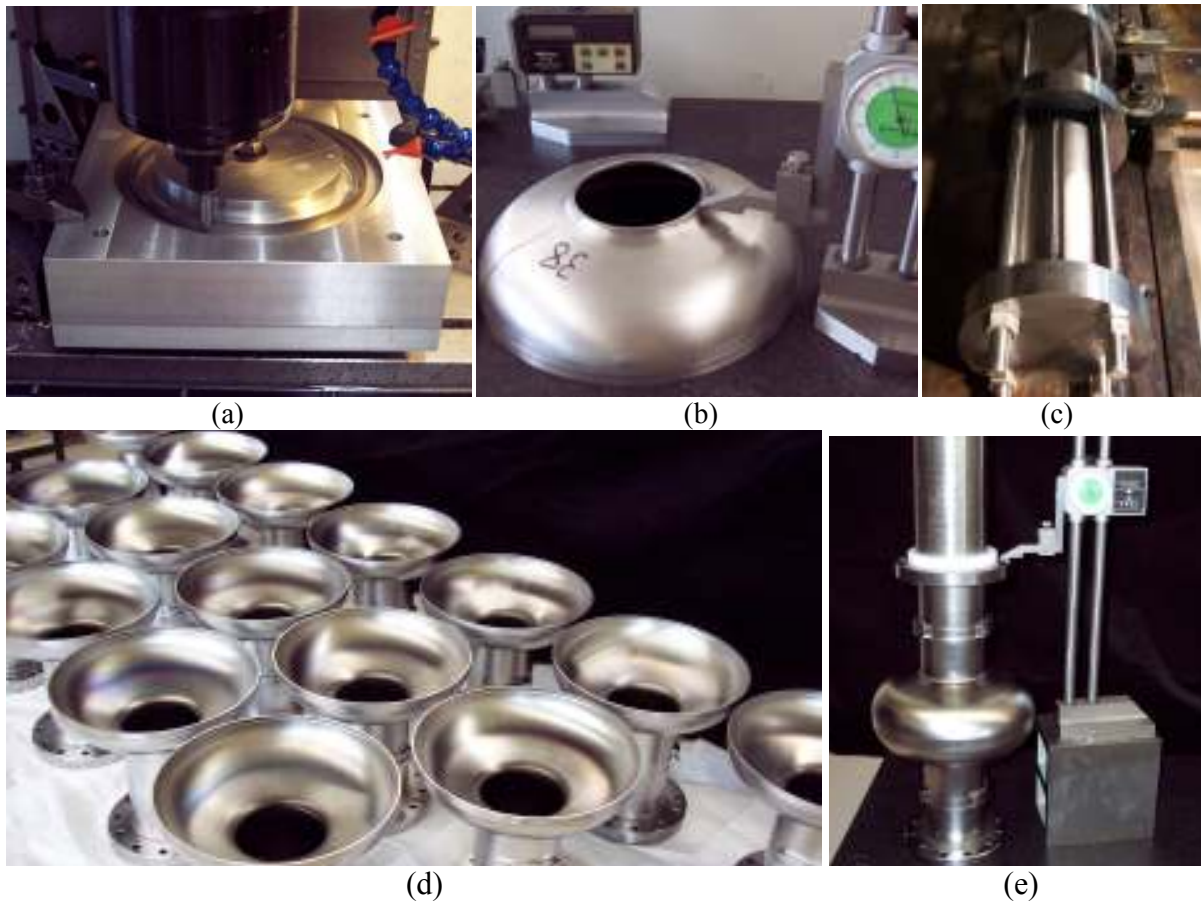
(a) trimming a half cell; (b) quality assurance of trimmed half cell; (c) beam tubes after EB welding; (d) half cell assemblies after iris welds; (e) cavity length check after iris welds (weight on top)
